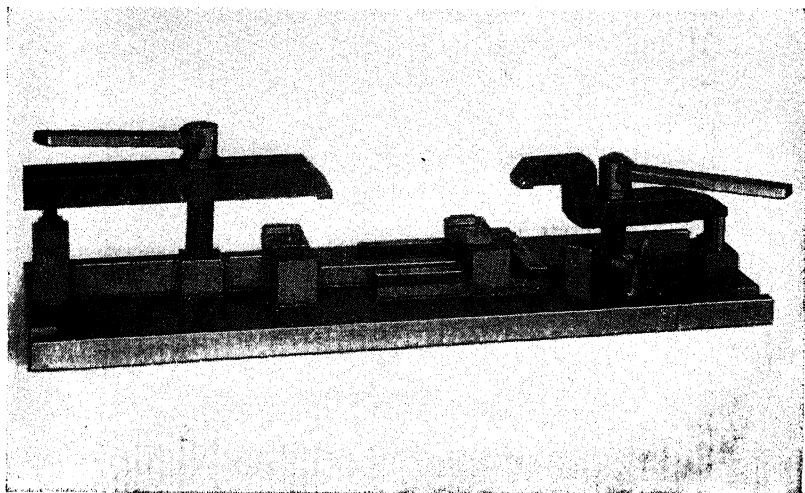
Welded steel machining fixture built at a saving of 50%.
